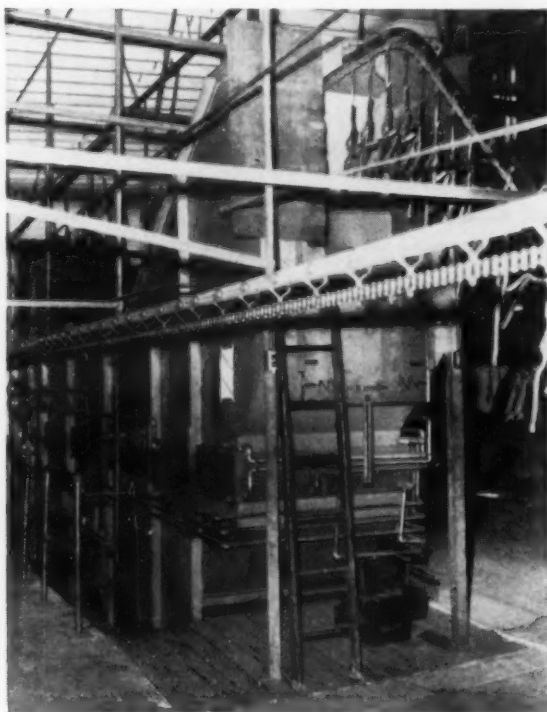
Degreasing tunnel is first operation in cleaning department as parts come from machining and subassembly.
